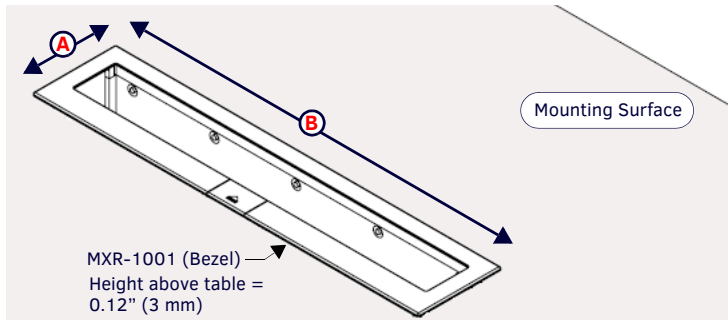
ABOVE-SURFACE DIMENSIONS OF MXR-1001
